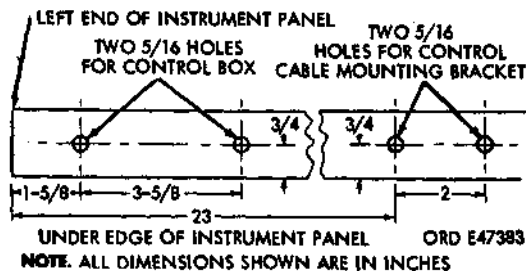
Location of mounting holes for control cable, mounting bracket and control box
